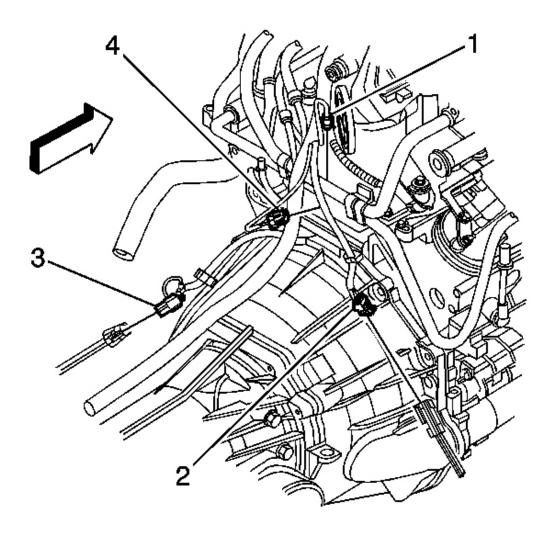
Locating Components Connectors At Rear Of Engine Courtesy of GENERAL MOTORS CORP.
